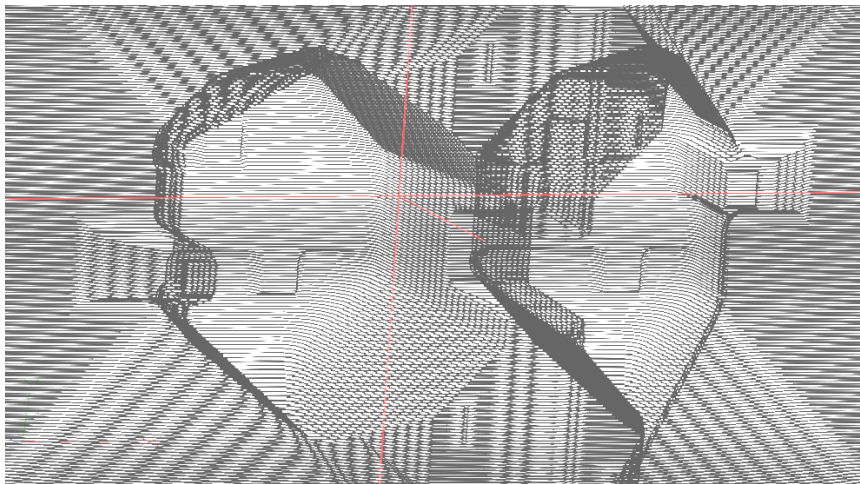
Case 6: complex micro milling tool paths space frame mould shape
